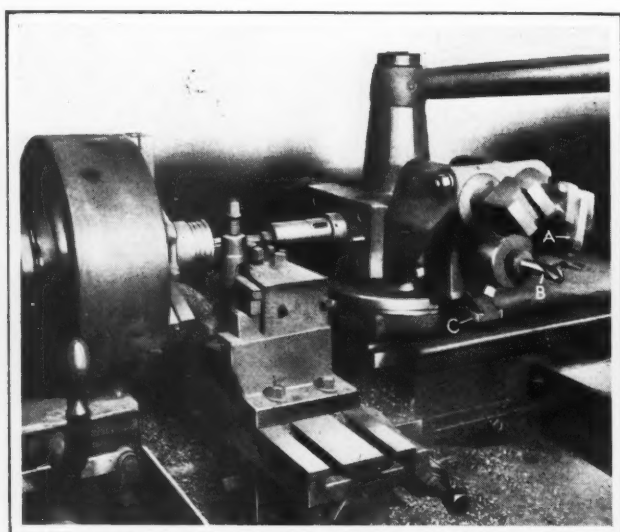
Tooling Employed in the First Operation on the Cylinder Heads
